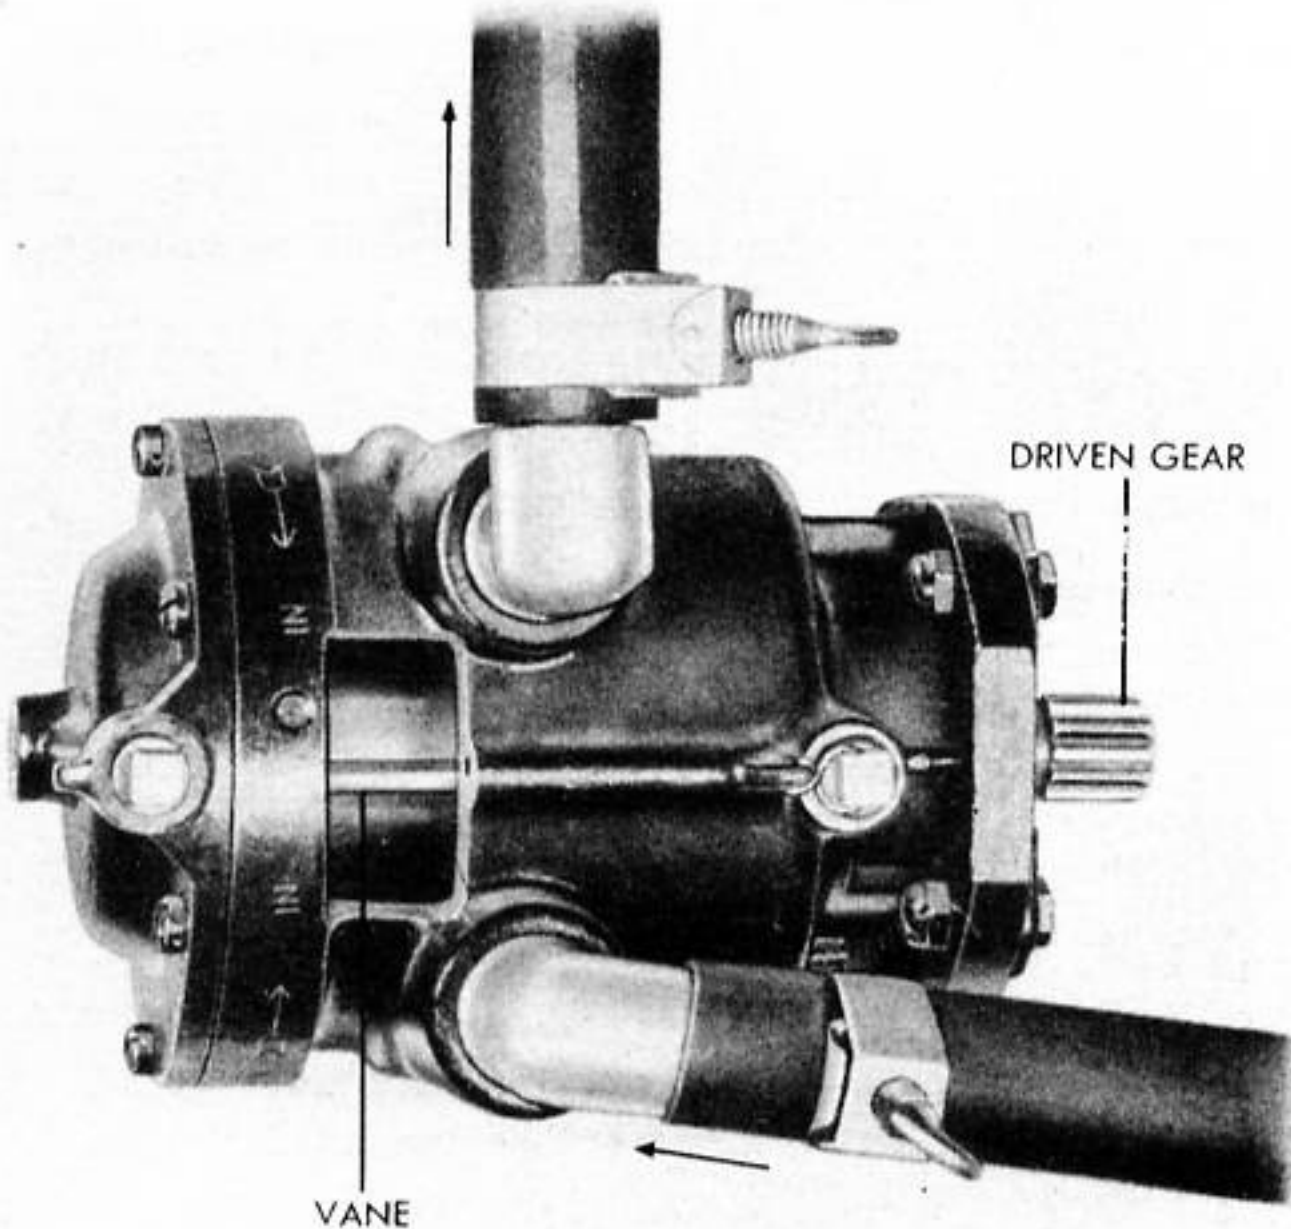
VACUUM PUMP - CUTAWAY VIEW
